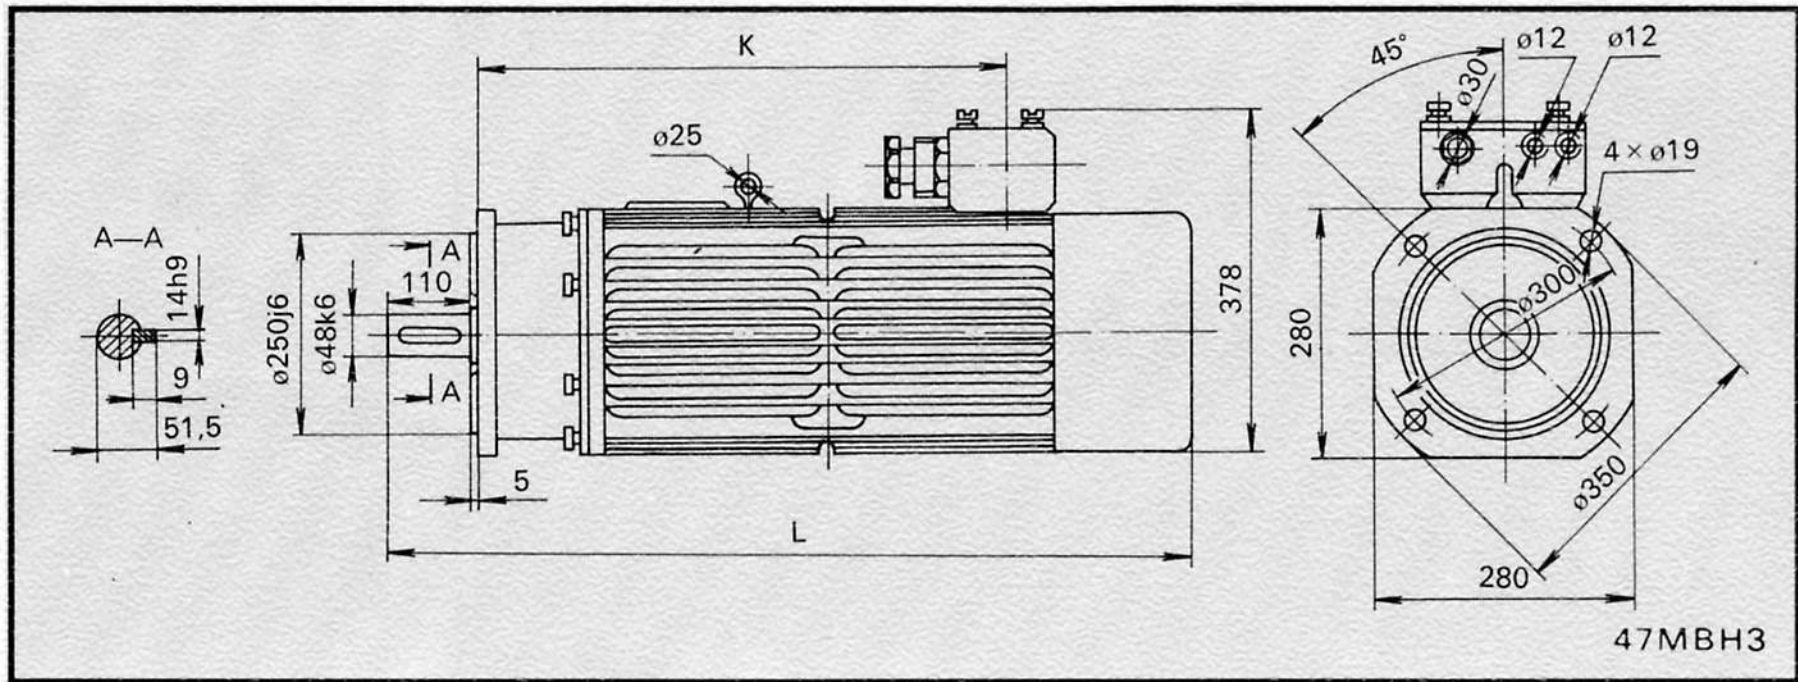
DC motor 47MBH-3C. Overall dimensions.
